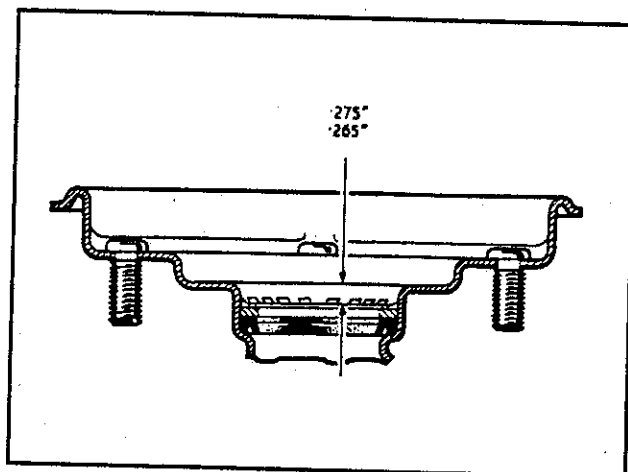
Seal, Bearing and Retainer (See special tool section)
